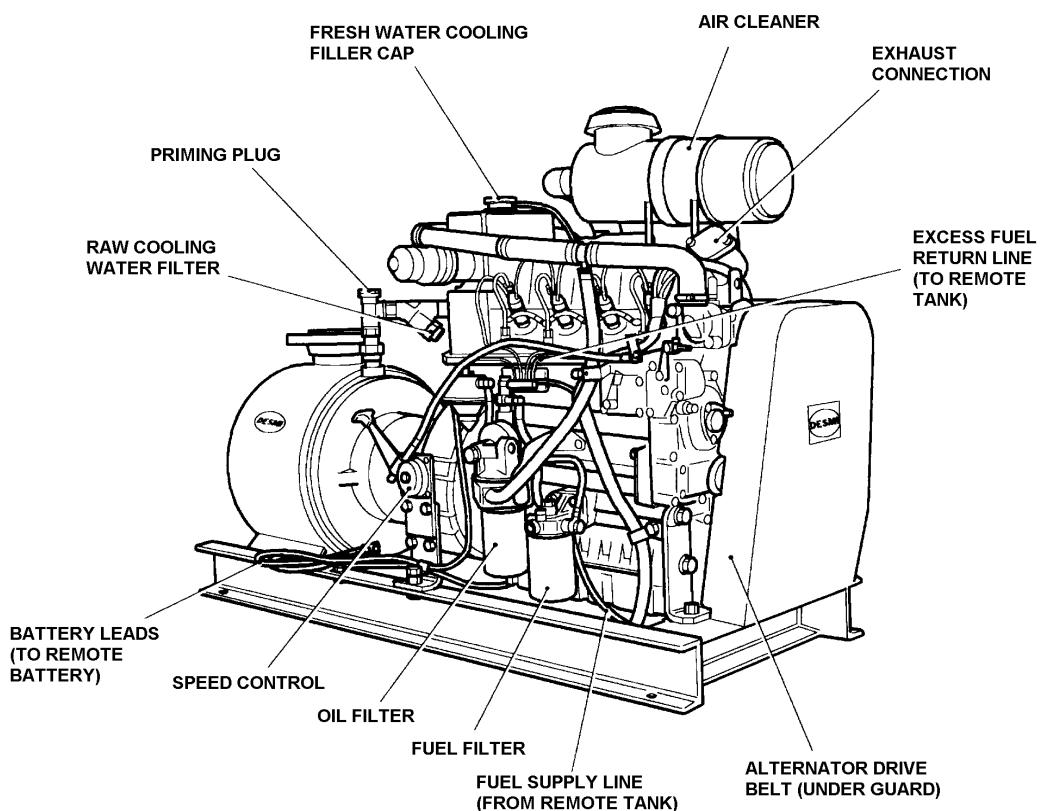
D-1. Desmi S100 LDW 2004 Diesel Fire Pump
